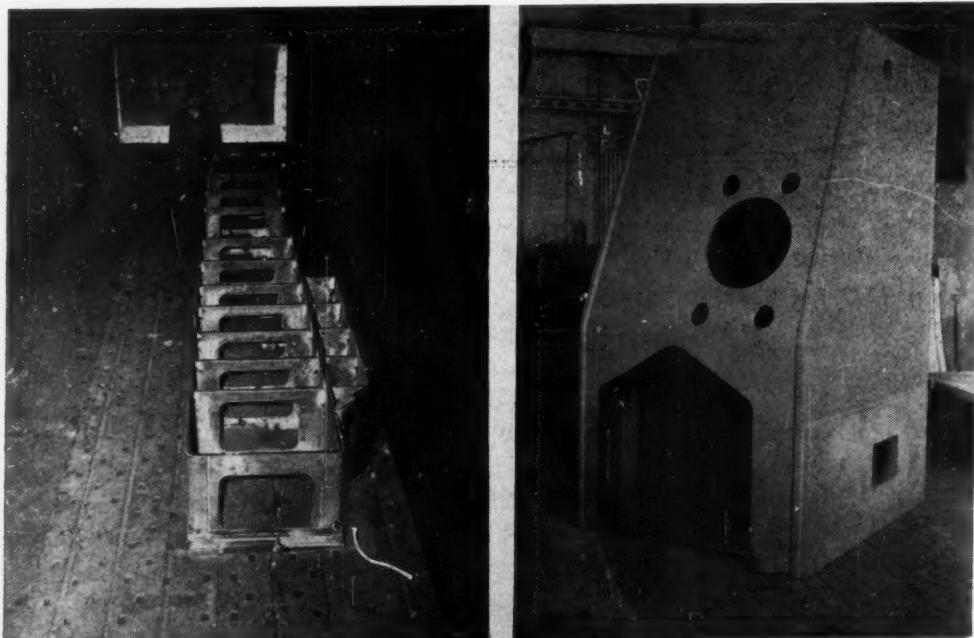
Extreme left—Upside down view of Hydro-Tel milling machine base, in one piece. Fig. 7—Left—Machine headstock, showing finished painted structure prior to machining
